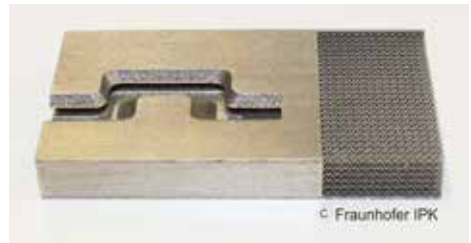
Selective Laser Melting manufactured raw workpiece without electronic components (© Fraunhofer IPK)
